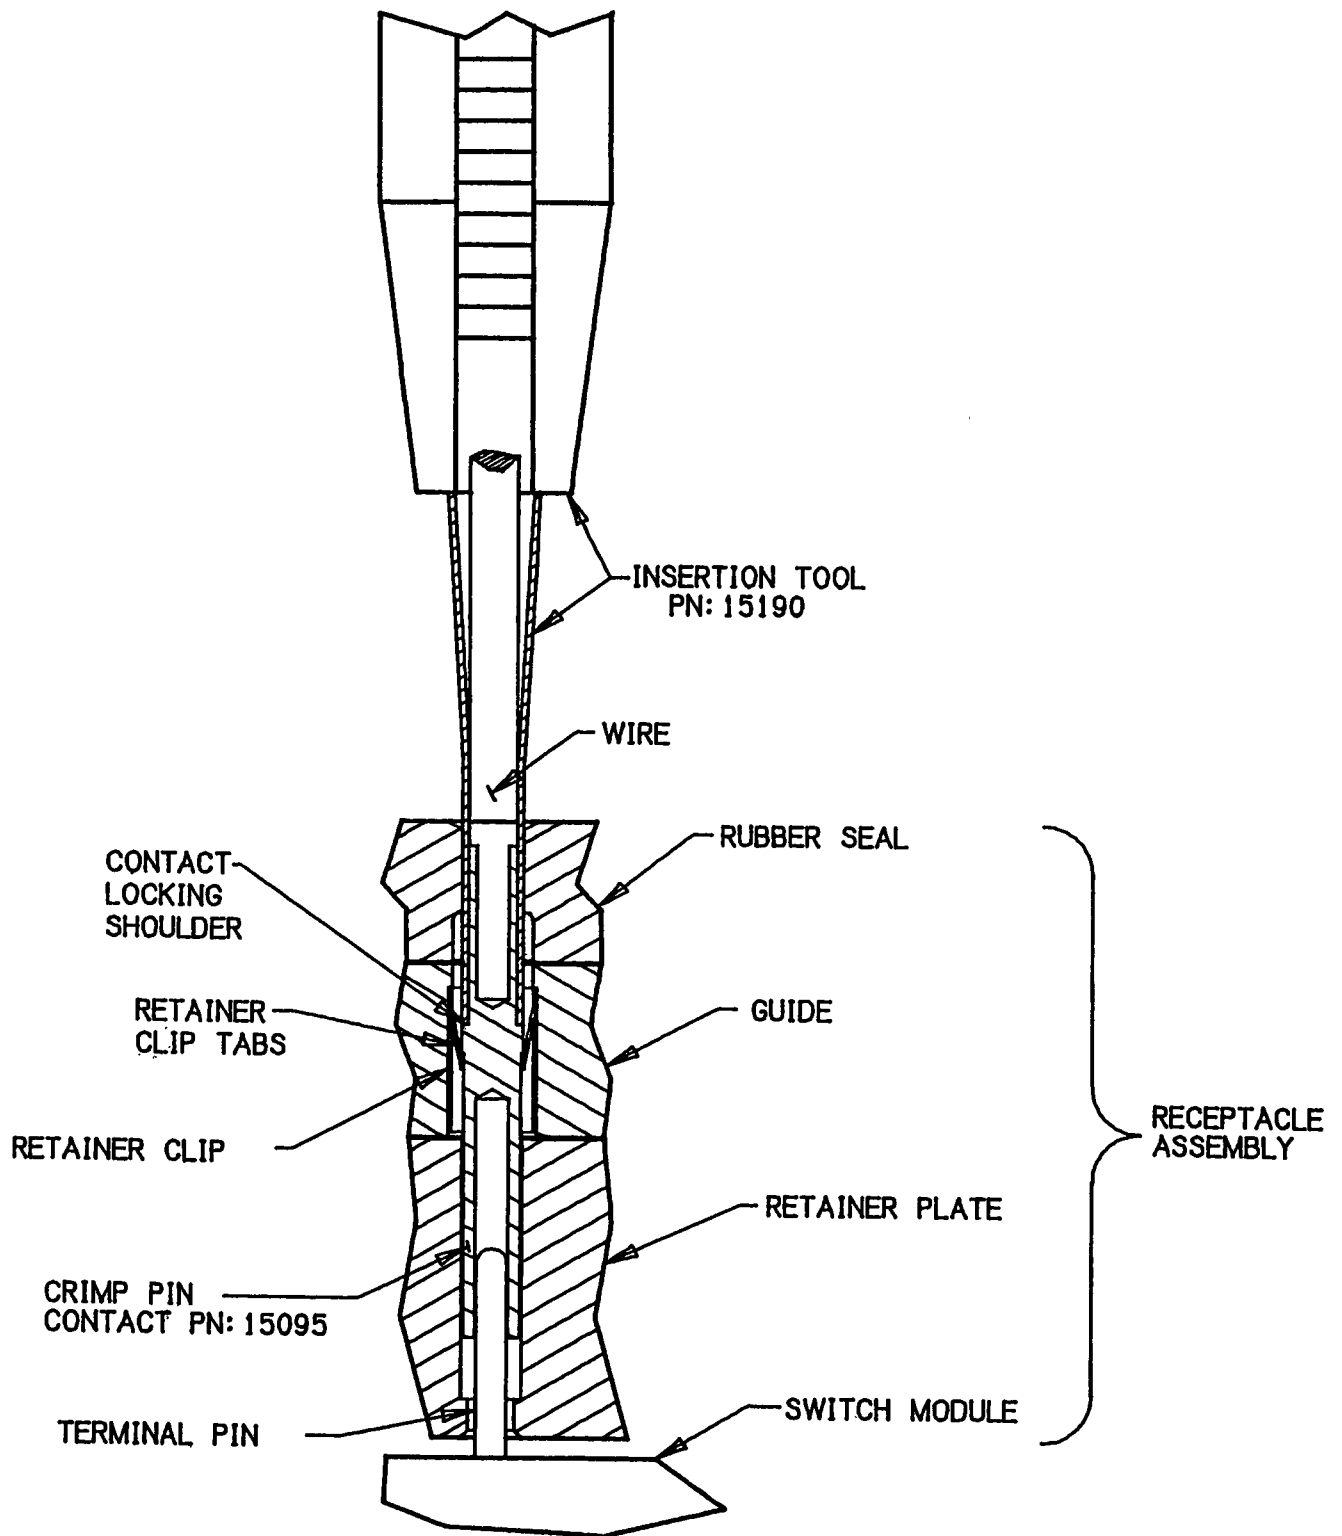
INSERTION OF WIRE-CONTACT ASSEMBLY
